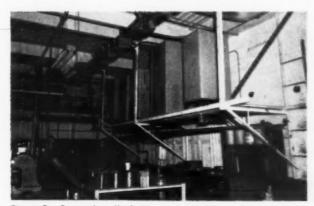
Power for all plating is supplied from these rectifiers, mounted overhead in a clean, easily accessible place. Bus bars run down the wall to underfloor tunnels to each tank.
